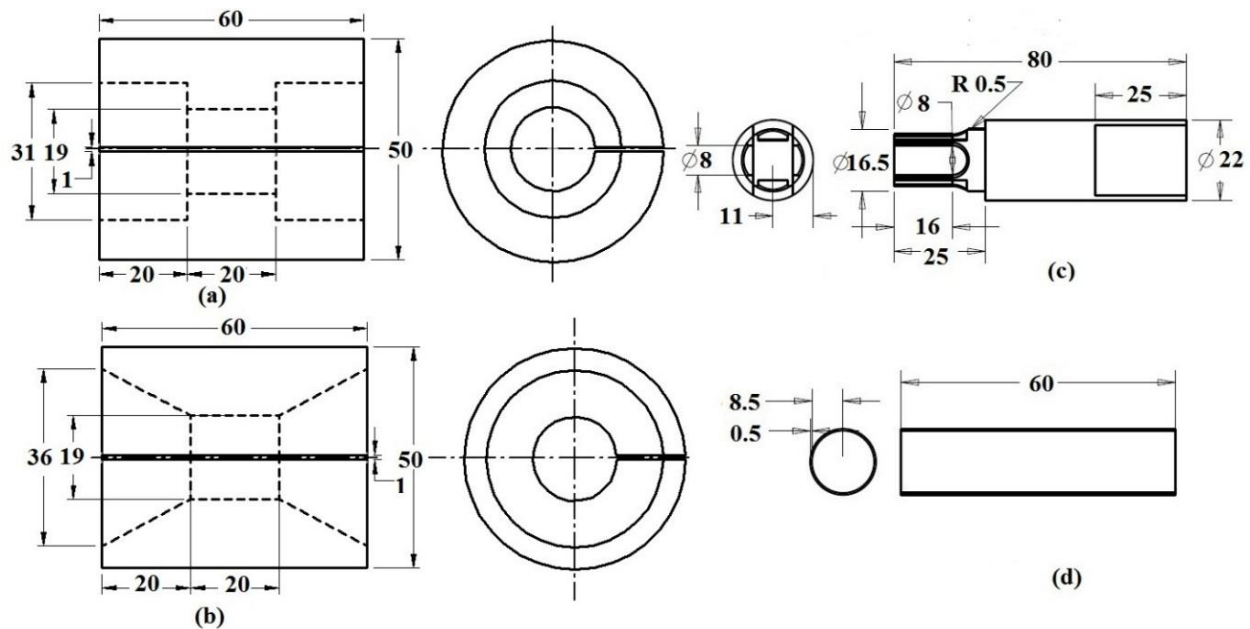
1 Geometry and dimensions of (a) single-stepped field-shaper (b) tapered field-shaper (c) rod and (d) tube (All dimensions are in mm)
